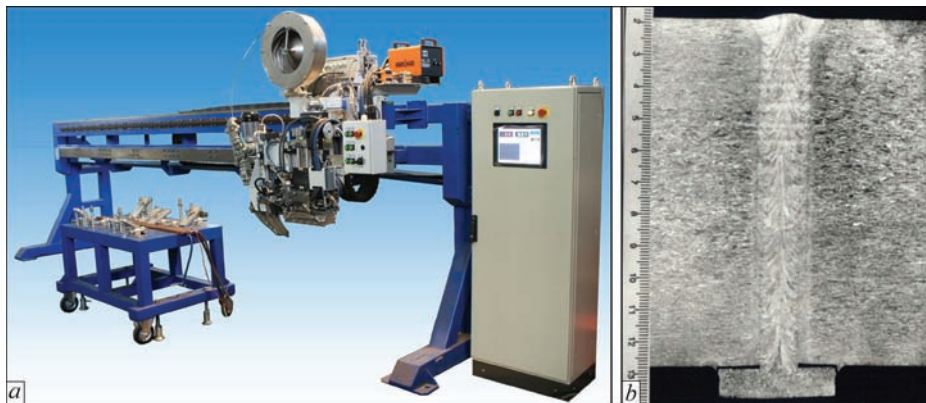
Welding equipment UD 682 for welding and surfacing of parts of up to 110 mm thickness and up to 4 m length (a) and macrosection of welded joints (b)
